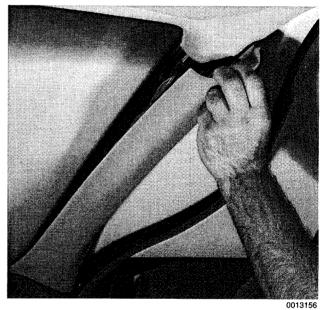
A-pillar (windshield pillar) trim removal. Right side shown, left is similar.
